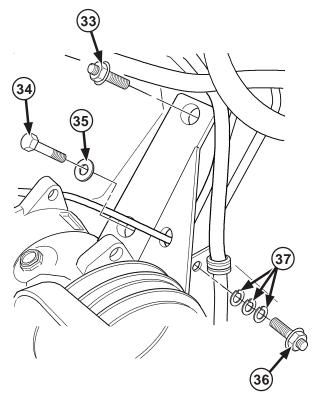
Compressor Mounting Bracket to Cylinder Head
